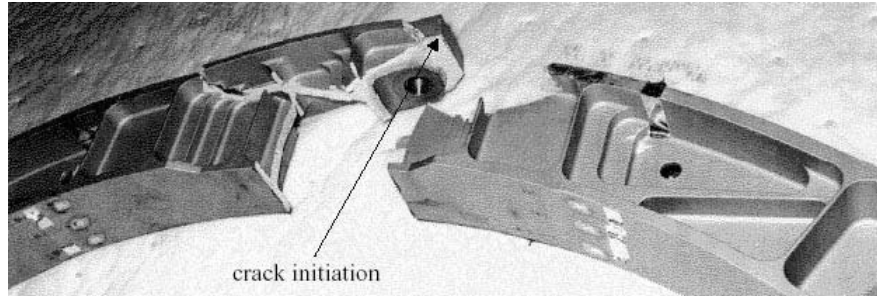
F-16 479-bulkhead test specimen number -7B, post-failure crack initiation
